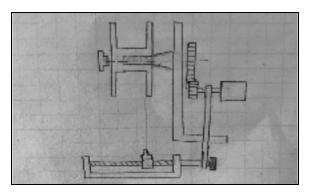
Top down concept sketch of spooler with guiding mechanism
